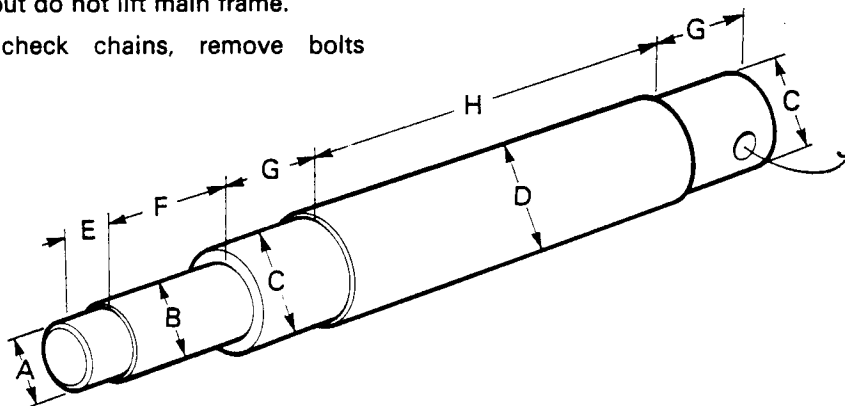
CLUTCH PLATE PILOT — 1200 TRACTORS
